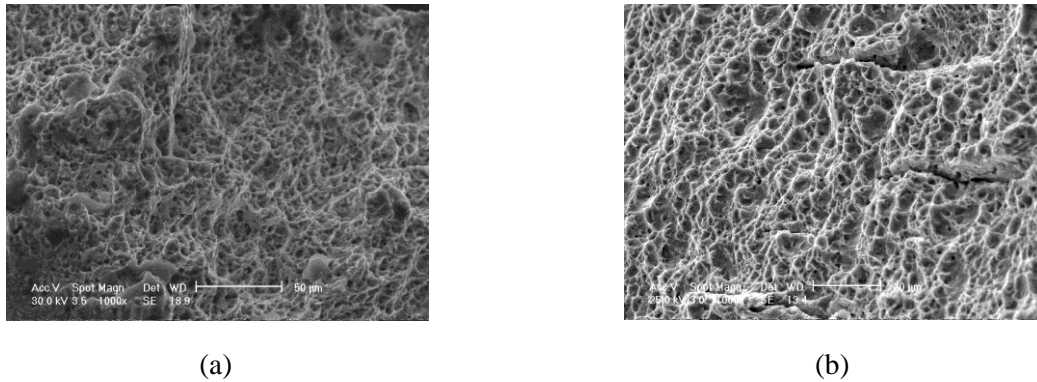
Fracture surface of (a) unirradiated and (b) irradiated clad (irdd1) specimens under SEM.
